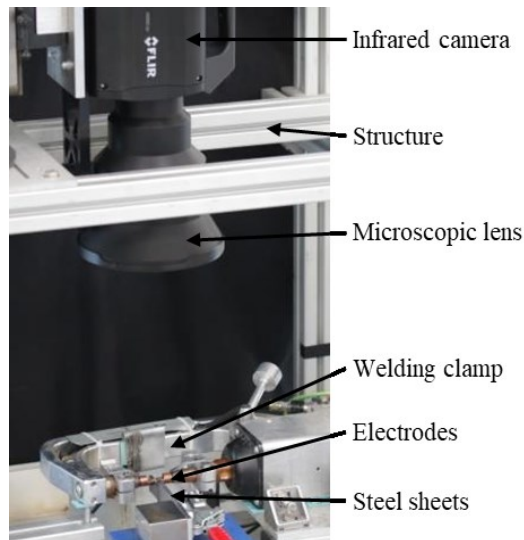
Specific welding device with the IR camera to observe the welding area.
